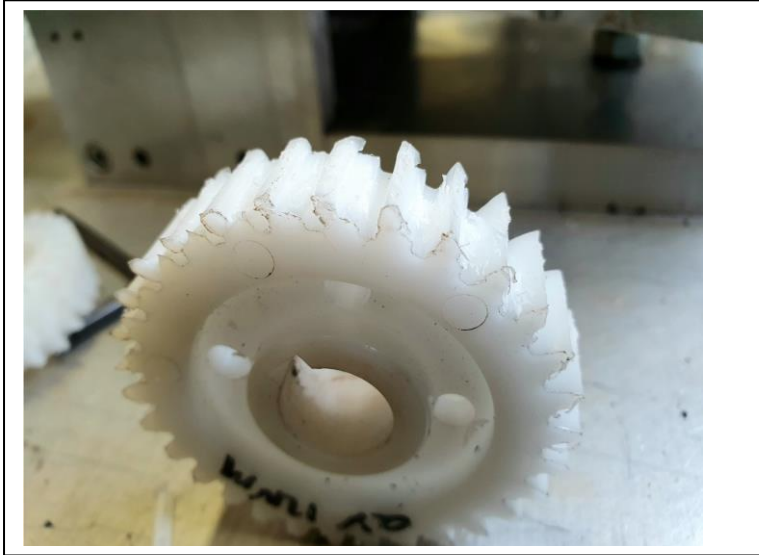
Visual appearance of a worn 22°C produced gears.
